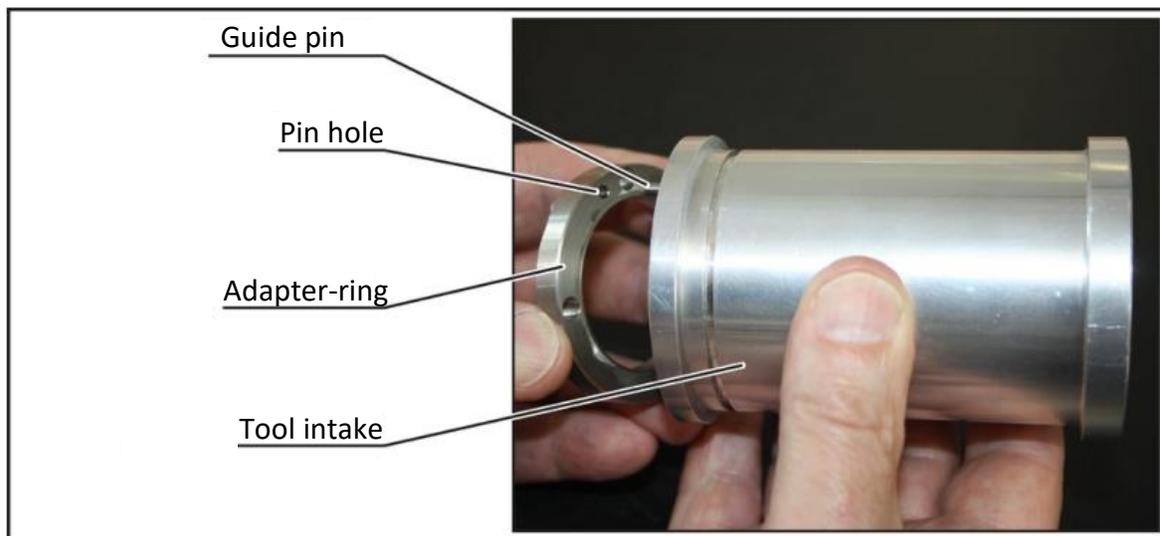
Assembling of the Adapter-ring (exemplary presentation).
